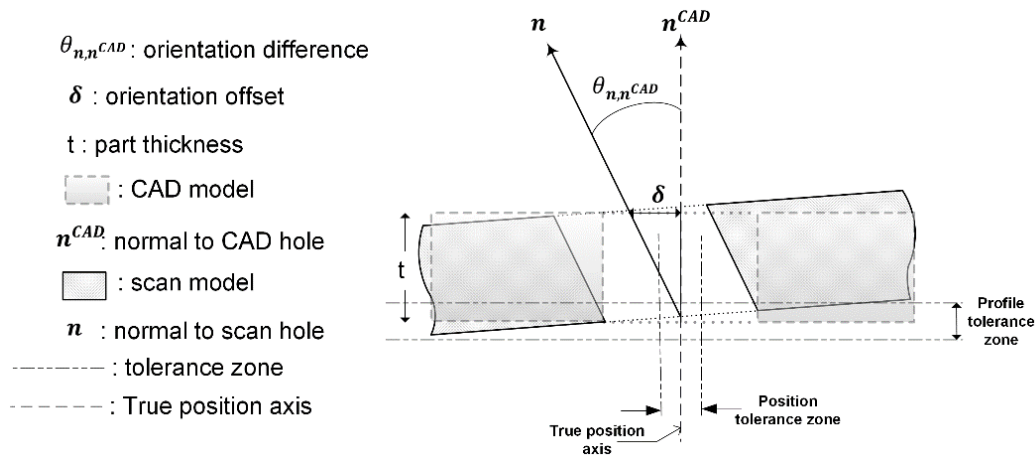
Discrepancy in alignment: assembly mounting hole on predicted scan model vs. CAD model [4].
